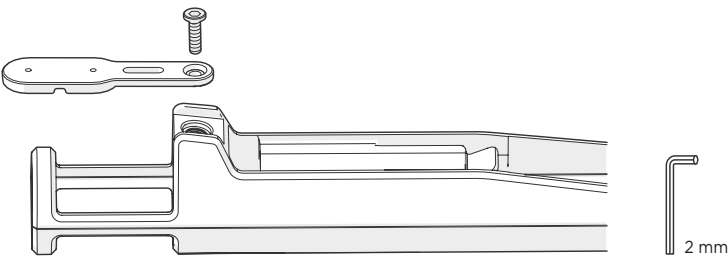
Fastening magnetic hanger to GMP252 probe handle
